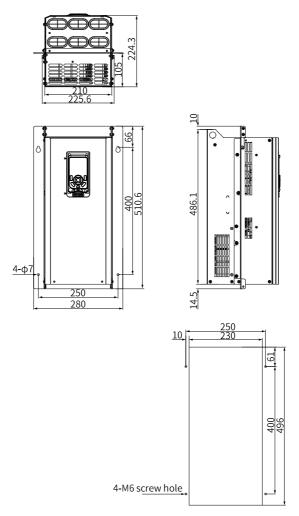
Mounting-hole dimensions (mm) of MD580-AZJ-A2T5
